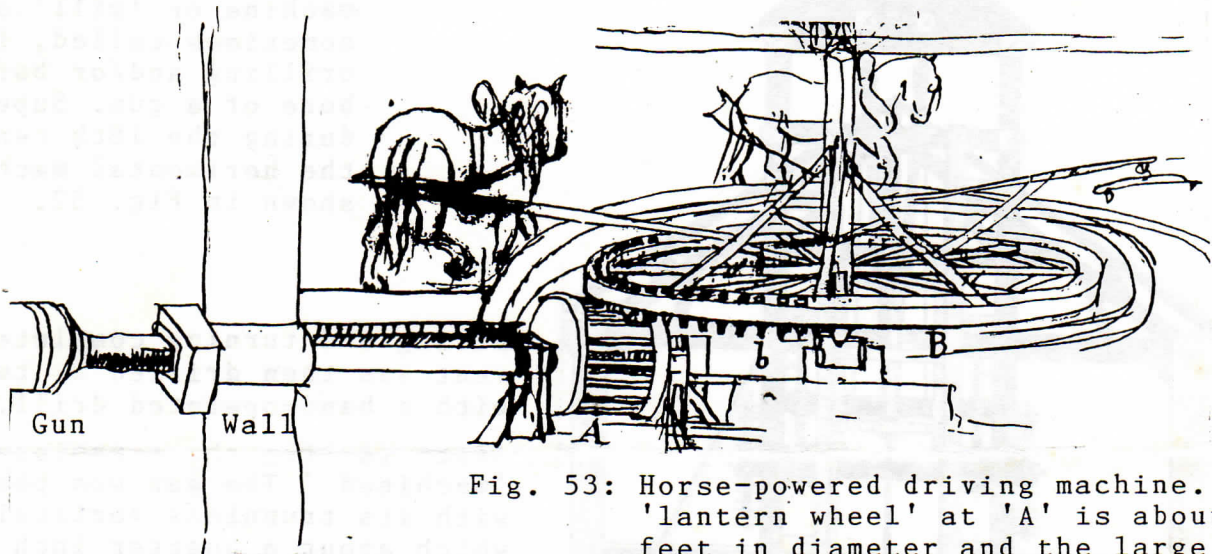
Horse-powered driving machine. The 'lantern wheel' at 'A' is about two feet in diameter and the large wheel B 11 to 12 feet.
